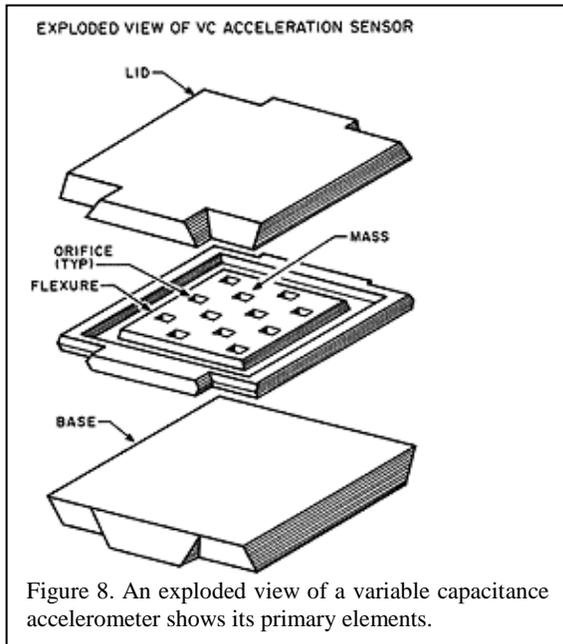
An exploded view of a variable capacitance accelerometer shows its primary elements.
